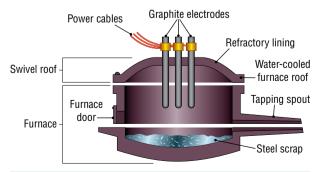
Steel can be manufactured using the electric arc furnace.
